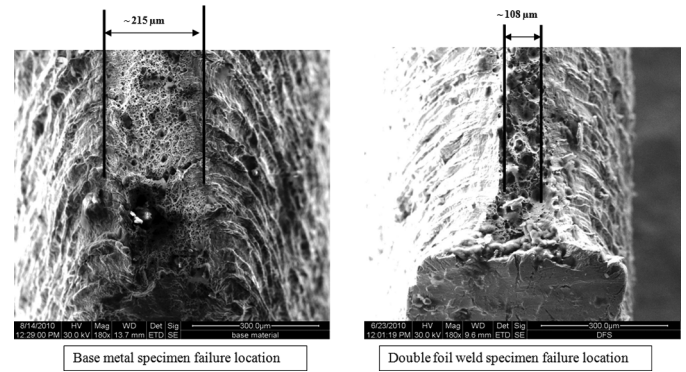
Fractography of base metal (180 \times) and double foil weld specimen (failure zone is base metal) 180 \times .
